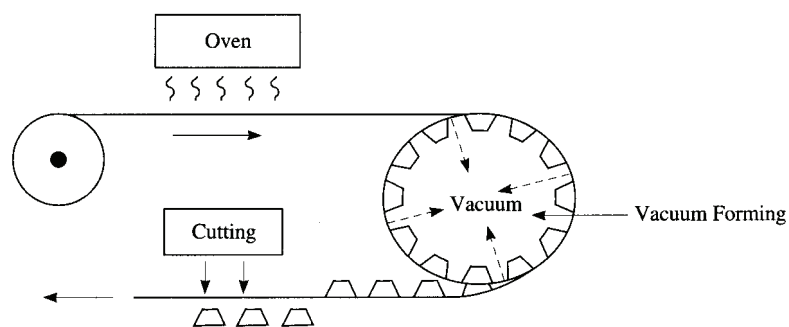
Form, fill, and seal automated thermoforming and packaging.
